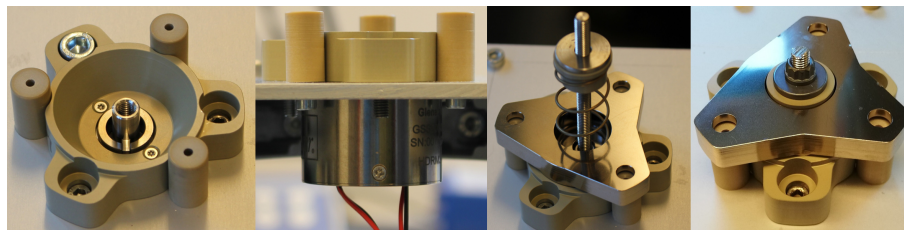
HDRM at different stages during assembly. Far right, a fully assembled one.
